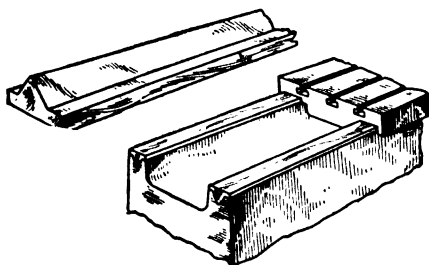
Wooden strips for protecting planer ways when not in use.
